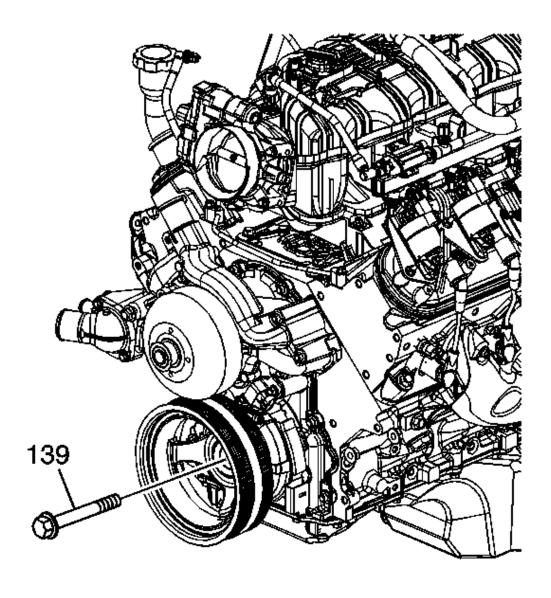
View Of Crankshaft Balancer Bolt Courtesy of GENERAL MOTORS CORP.
